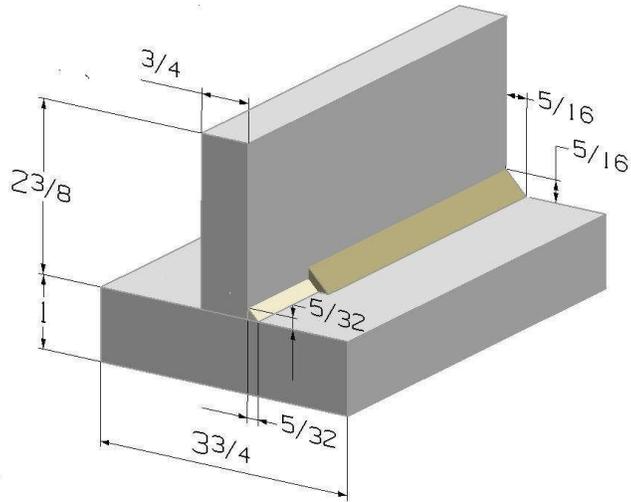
Schematic of the tee section coupon utilized for weld evaluation.
